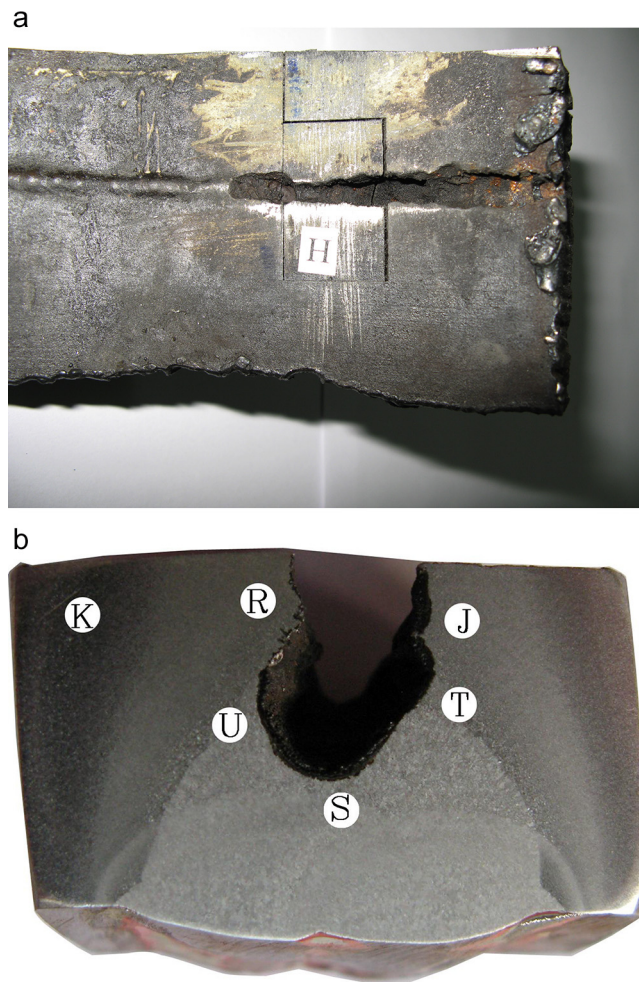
Appearance of the corroded cavity of the welded seam. (a) pattern of the corroded cavity; (b) appearance of the cavity after metallographic grinding.
